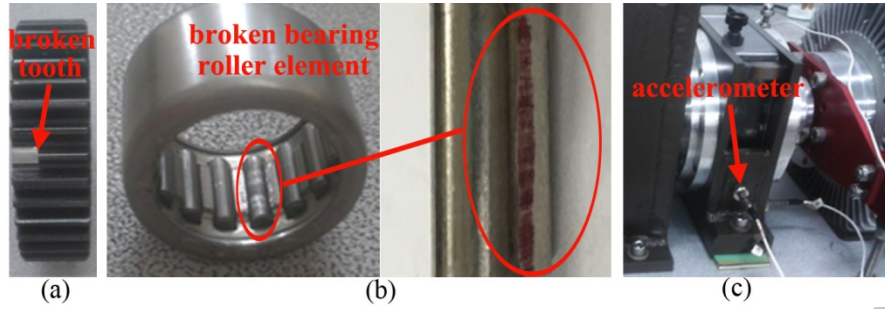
(a) gear with one tooth breakage; (b) bearing with rolling element damage; (c) installation location of accelerometer
